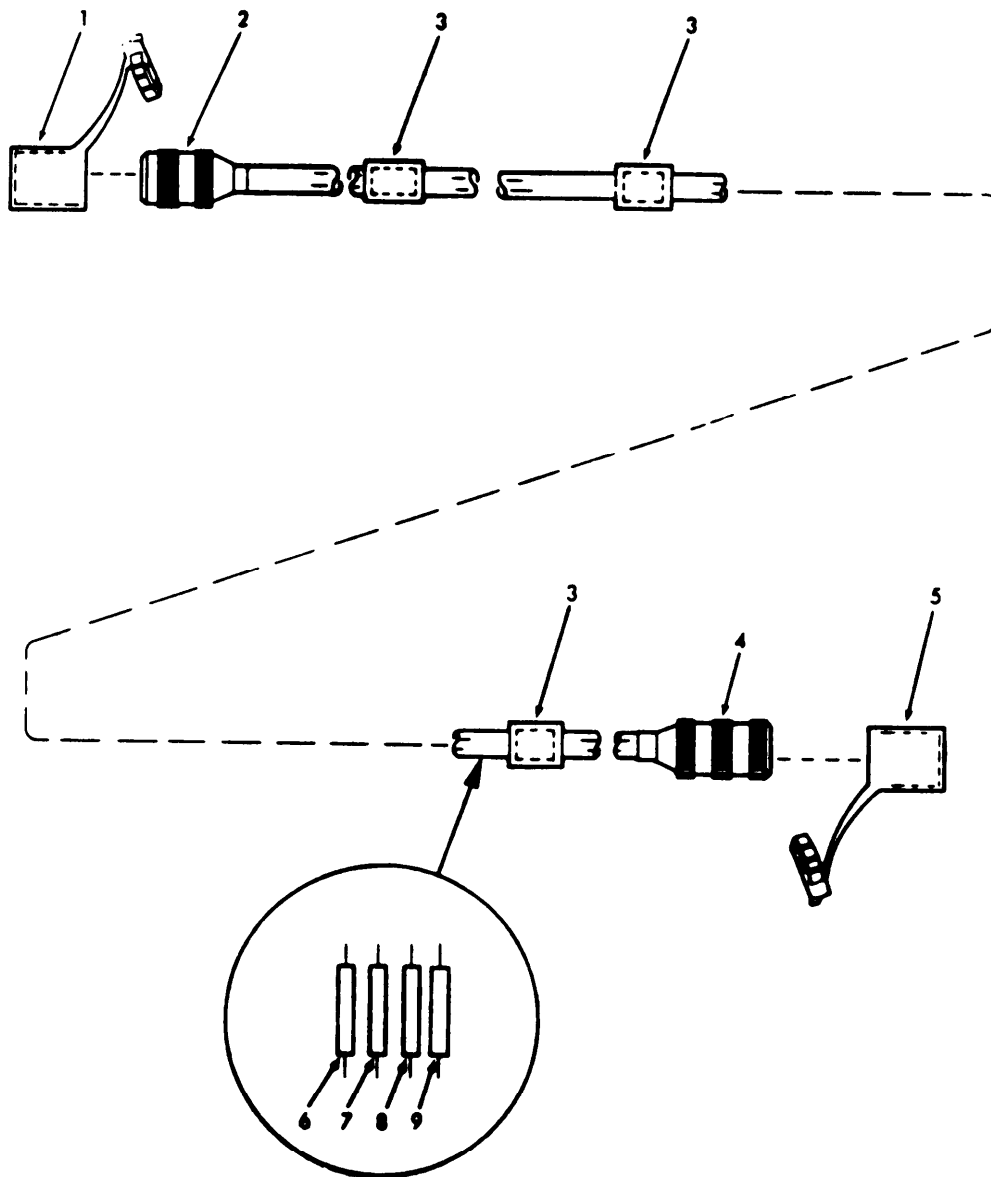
CABLE ASSEMBLY WI COMPONENT PARTS (ASSY P/N 12303425) AND ELECTRICAL PLUG CONNECTOR P2.
